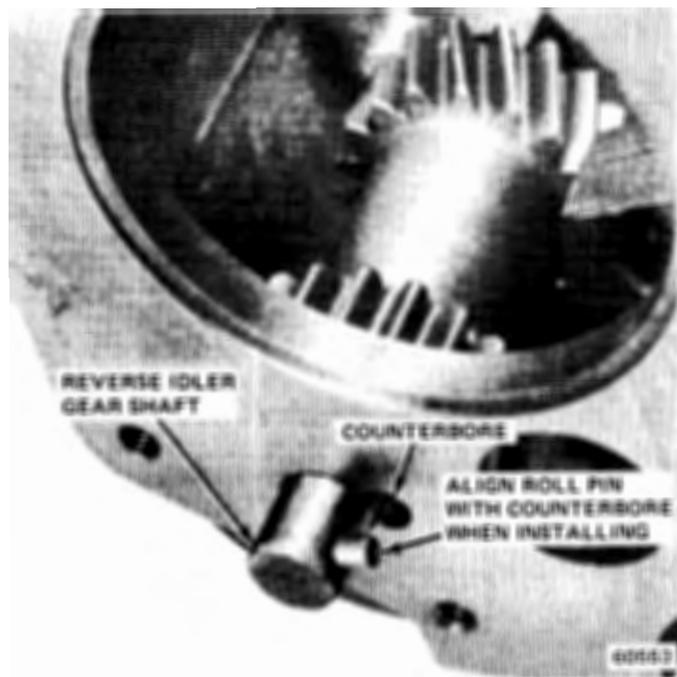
Removing-Installing Reverse Idler Gear Shaft
